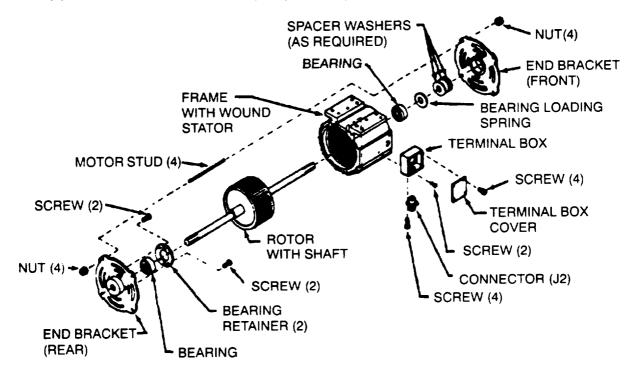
Condenser Fan Motor (B2) Internal Parts
